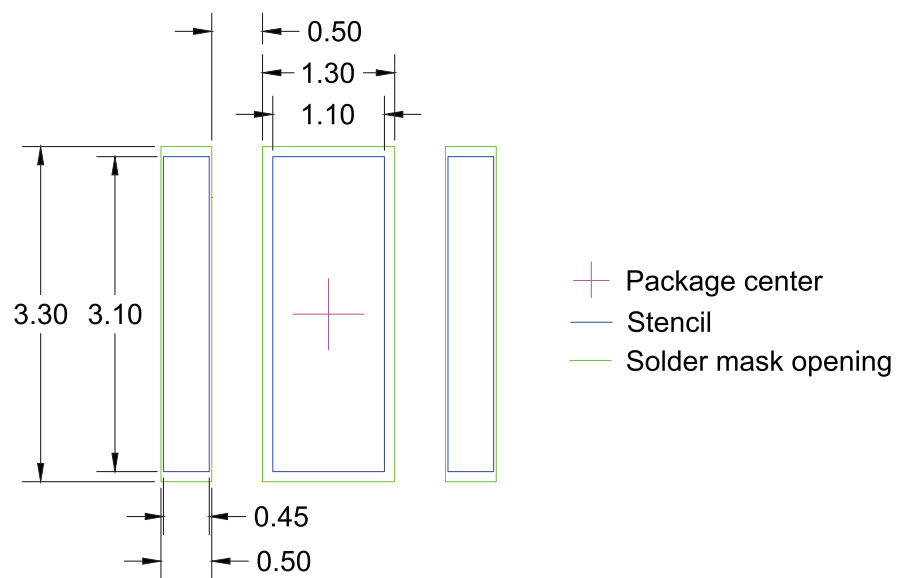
Recommended PCB solder pad layout for LUXEON V2.
